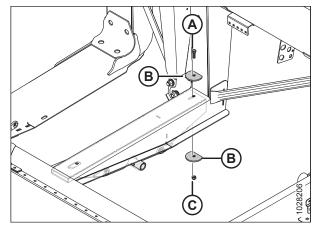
Inboard Arm Assembly and Left Header Leg – View from Above
